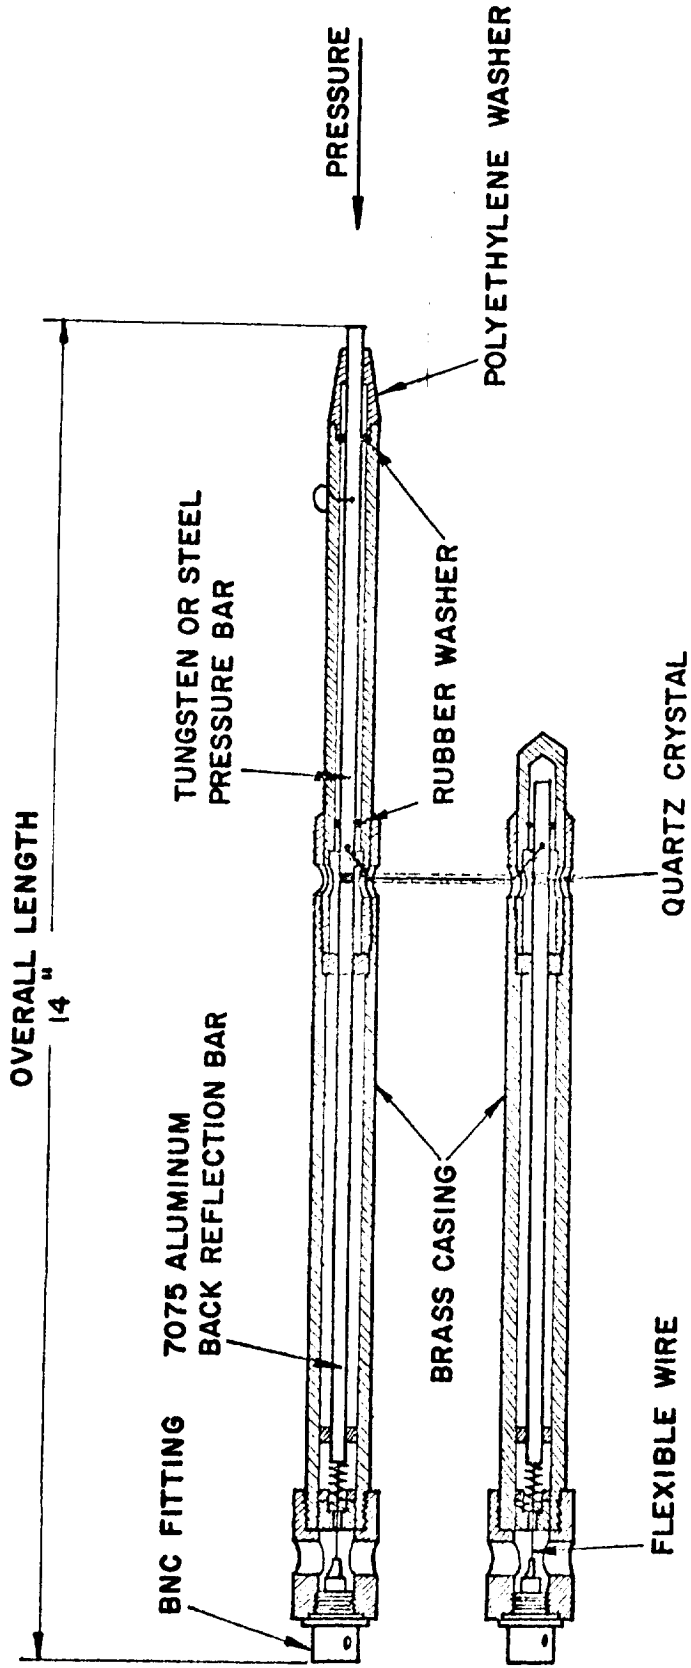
PIEZO-BAR PRESSURE GAUGE AND FILTER PROBE
